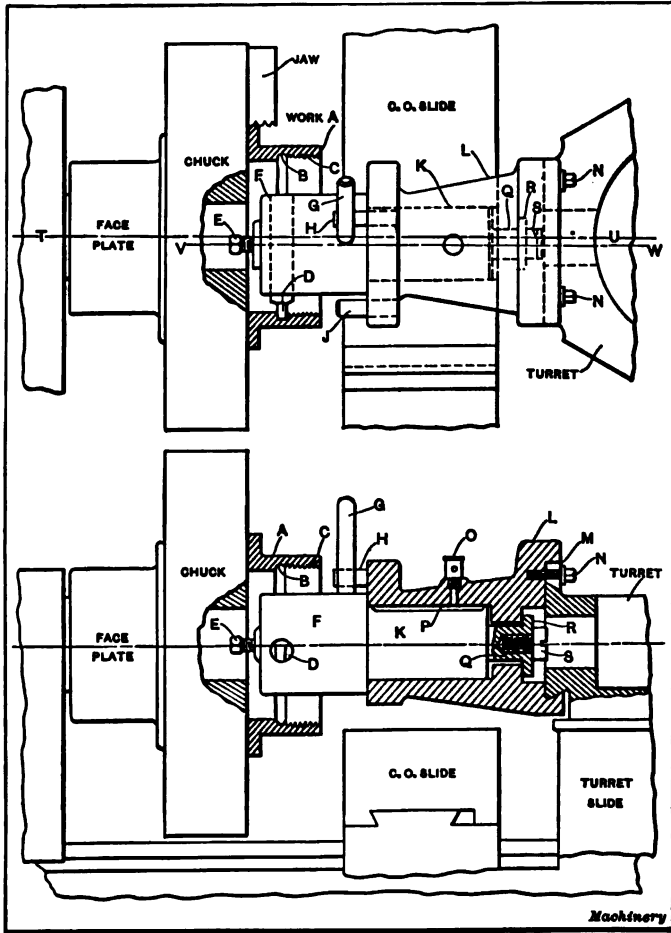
An Eccentric Recessing Tool for the Turret Lathe
